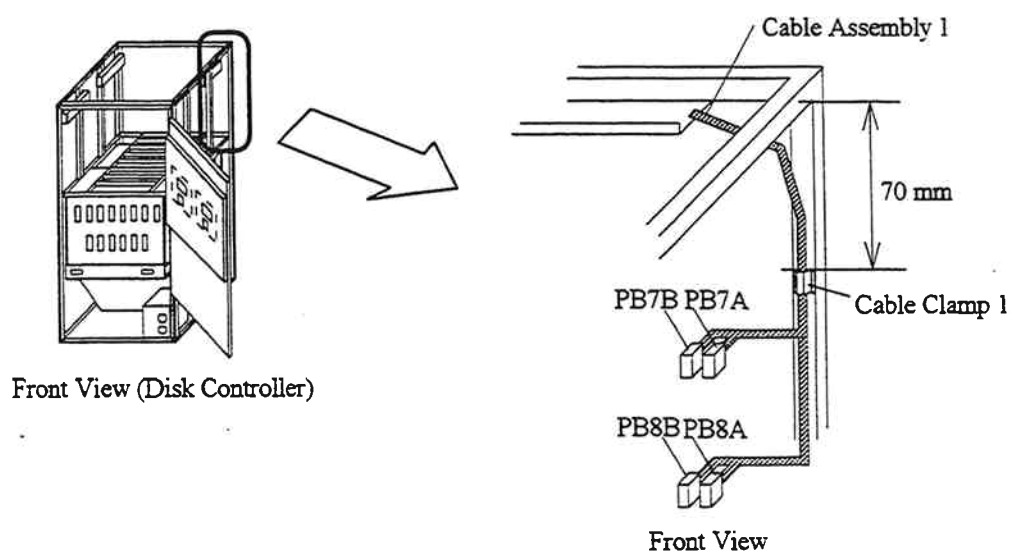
Attachment of the Cable Assembly 1
